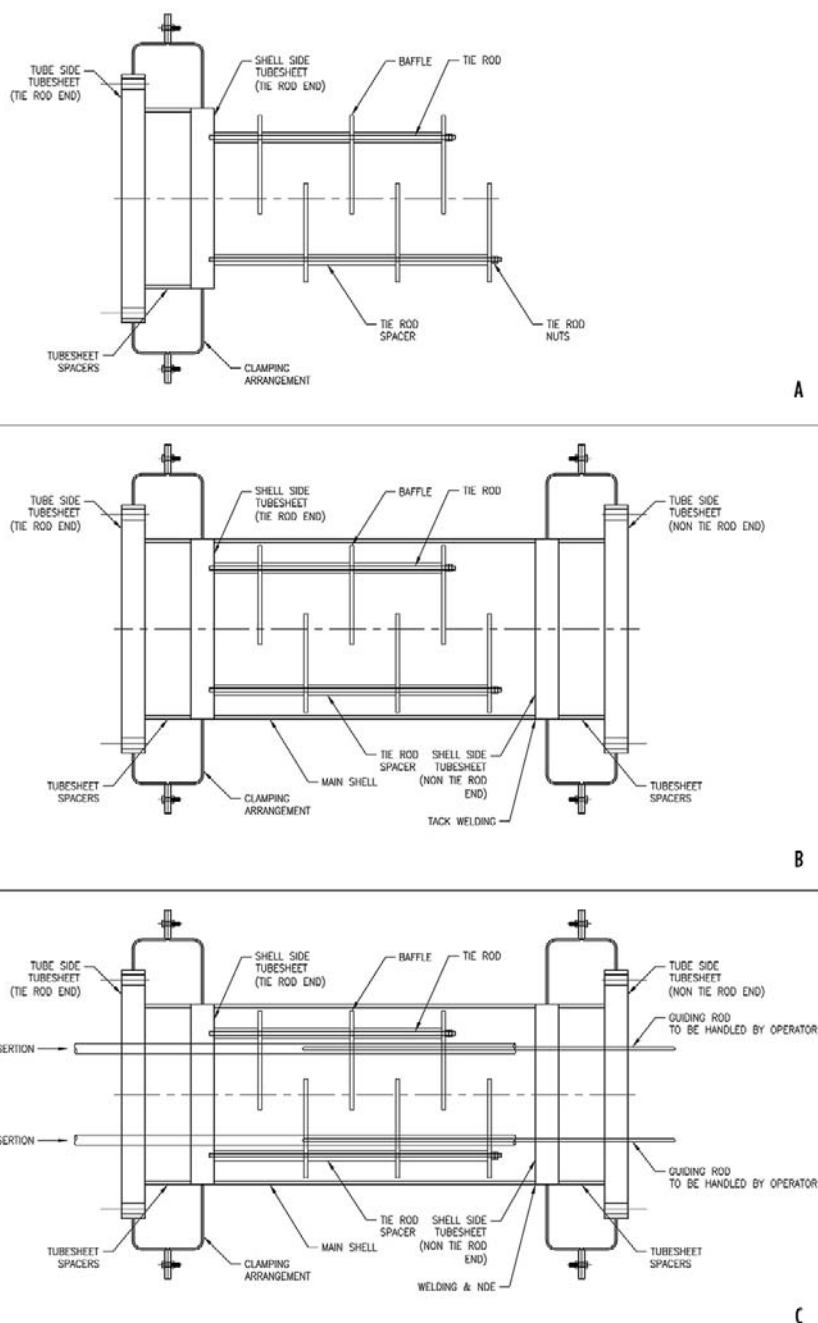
(A-C) A fabrication and assembly sequence (A-F) has been presented for a fixed double-tubesheet heat exchanger.
